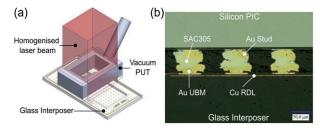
(a) 3D render of the LAB process with beam shaping. A stainless-steel vacuum pick-up tool (PUT) (b) cross-sectional image of an assembled PIC on a glass interposer.
